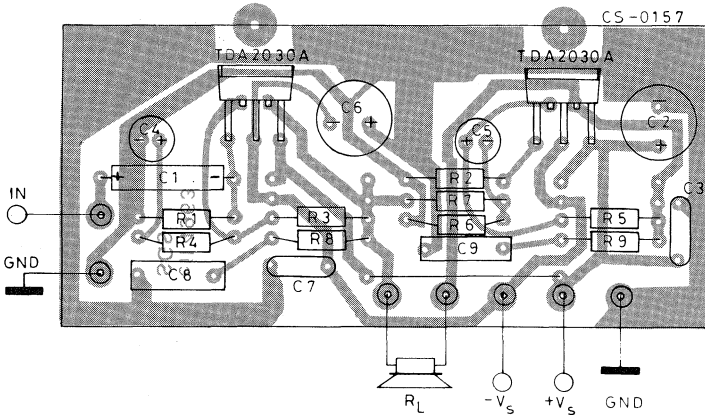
P.C. board and component layout for the circuit in fig. 16 (1:1 scale)
